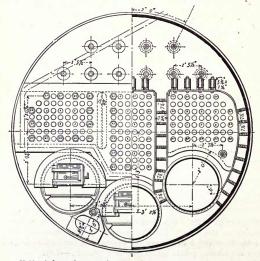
Half-end view and cross section of the single-ended marine boiler, shown in Fig. 124.
